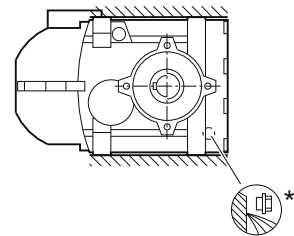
Mounting positions for parallel shaft gearbox F foot-mounted design, size 29
